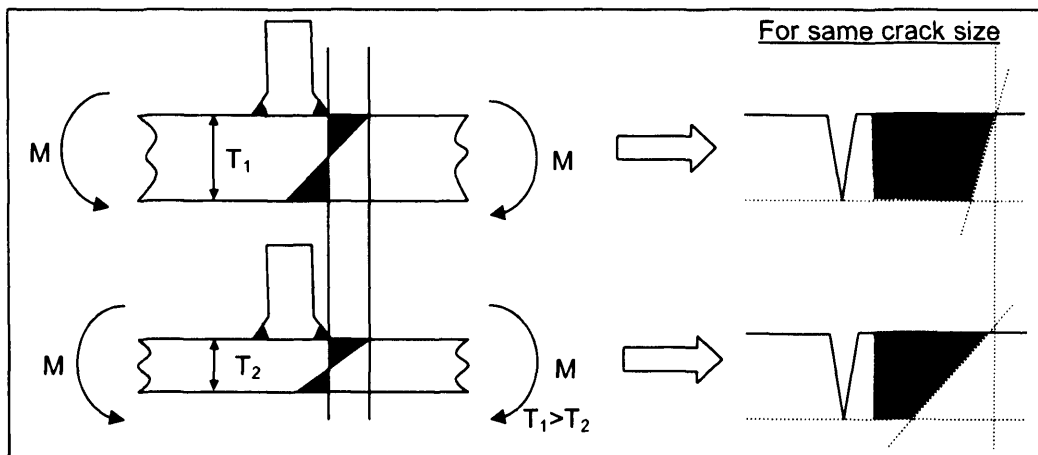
Stress gradient in a T-butt welded joint for different plate thickness
